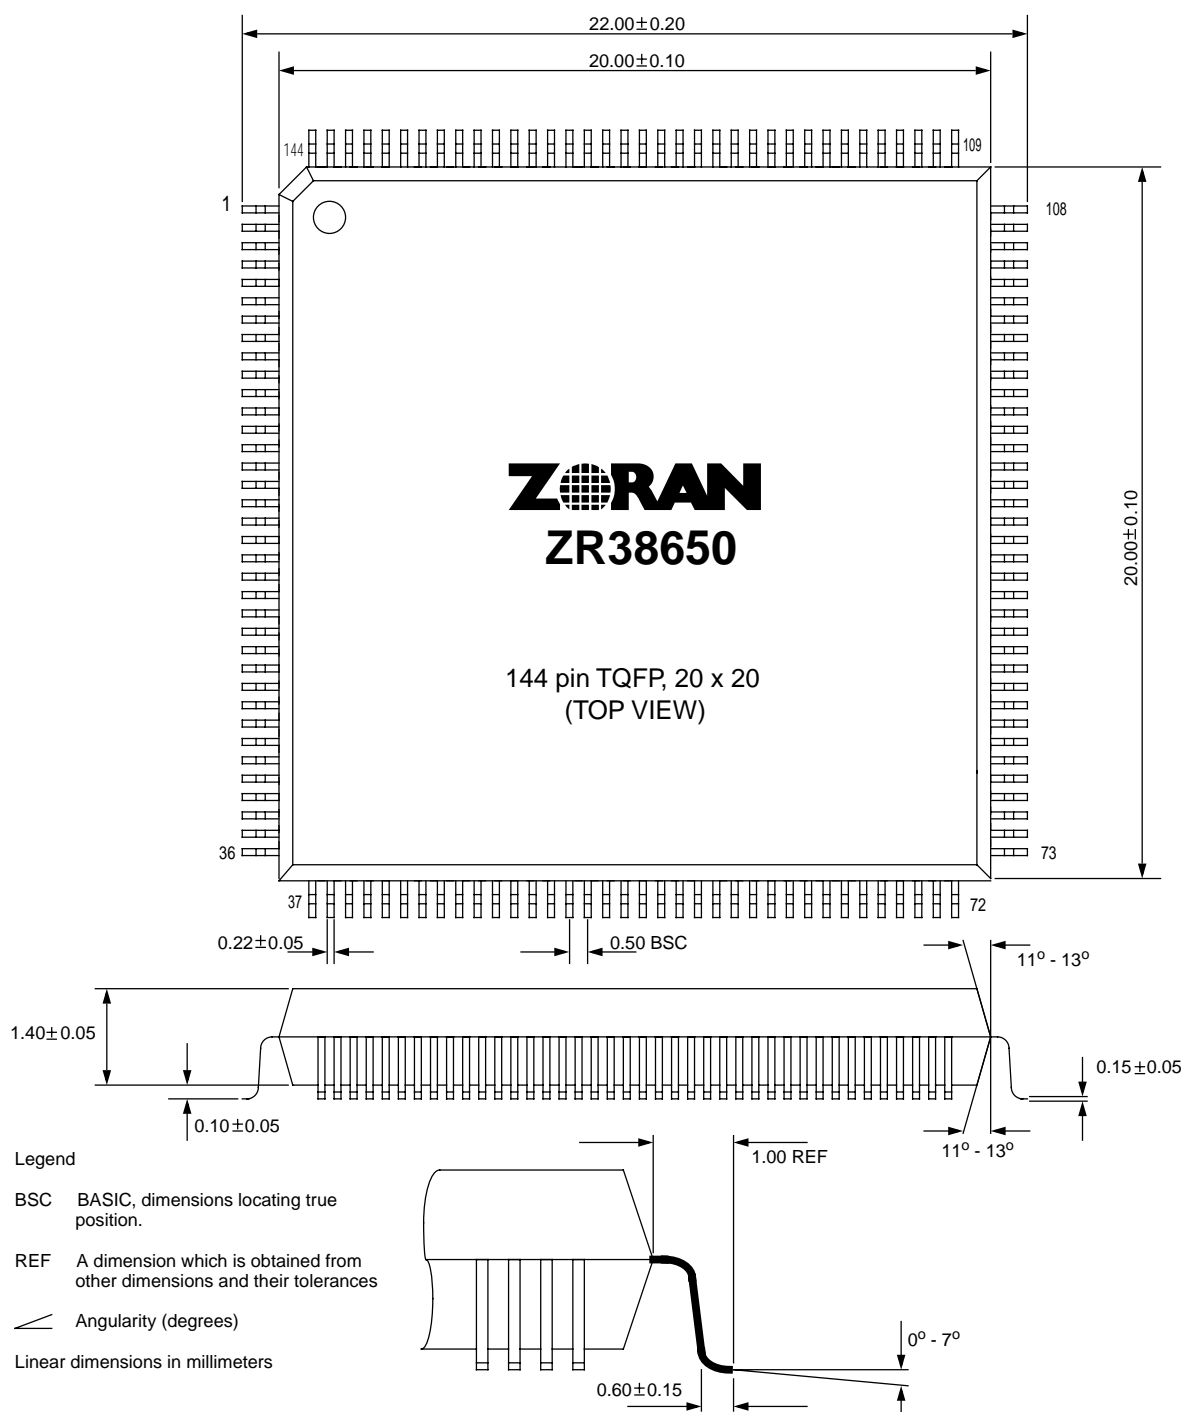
ZR38650 144-Pin TQFP Package Dimensions
